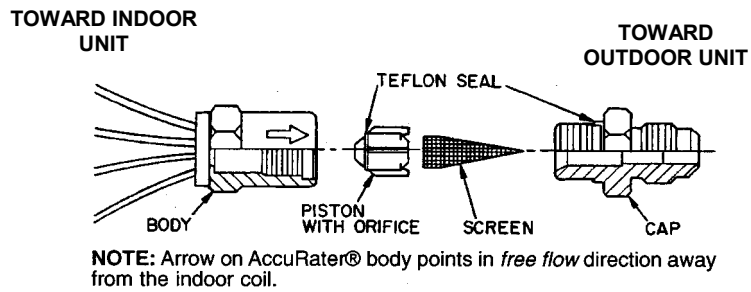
AccuRater Metering Device in Liquid Line (Bypass type Components)
